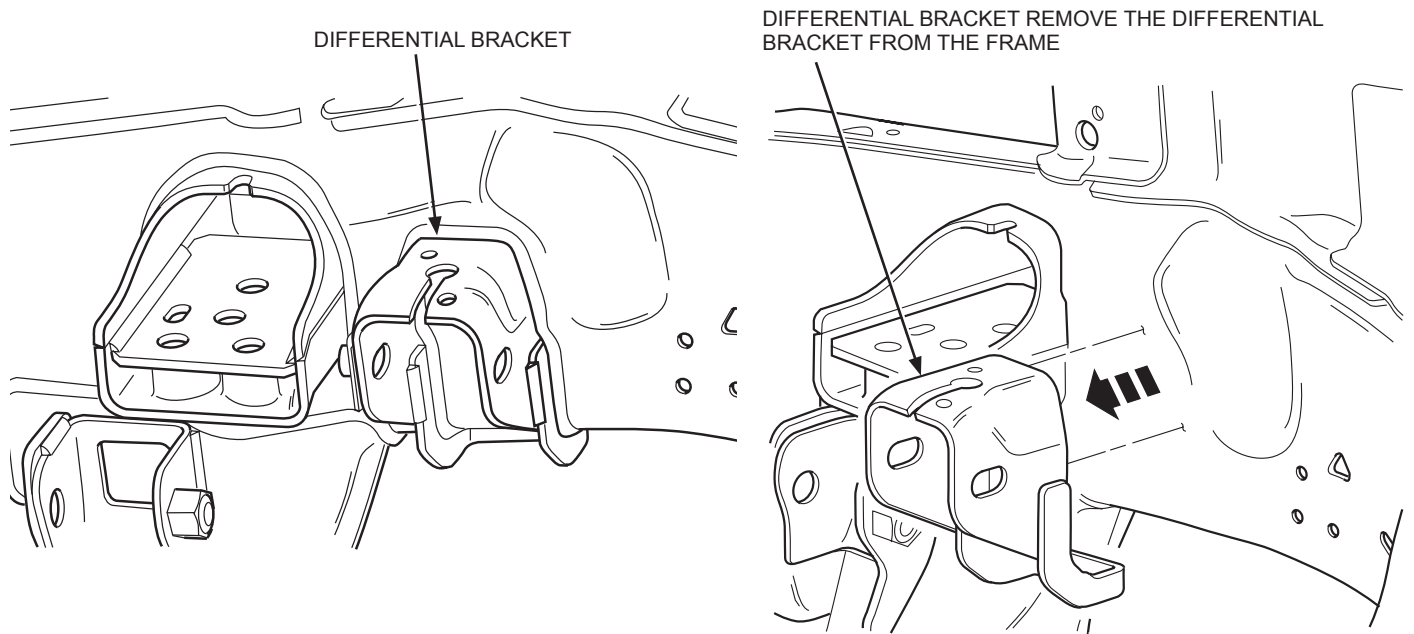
VIEW OF DIFFERENTIAL BRACKET WITH AXLE REMOVED.
